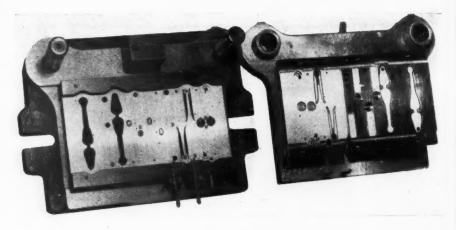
At left is shown a progressive die built of steel sections. At right, the face of the punch holder, showing the punch bodies surrounded by the stripper plate. This die produces the work shown in the preceding illustration.
